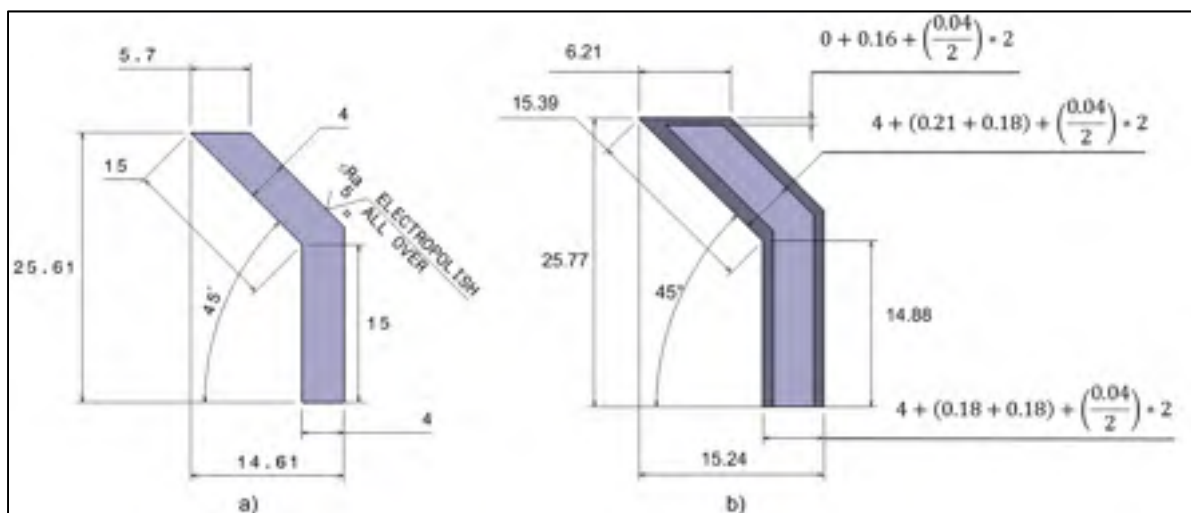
V-shaped specimen before and after EP: a) EP-specimen (nominal dimensions and roughness), b) L-PBF-built specimen (nominal dimensions + EP allowances + process tolerances); Dimensions are in mm and EP allowances are shown in a 5:1 scale, for better visibility
